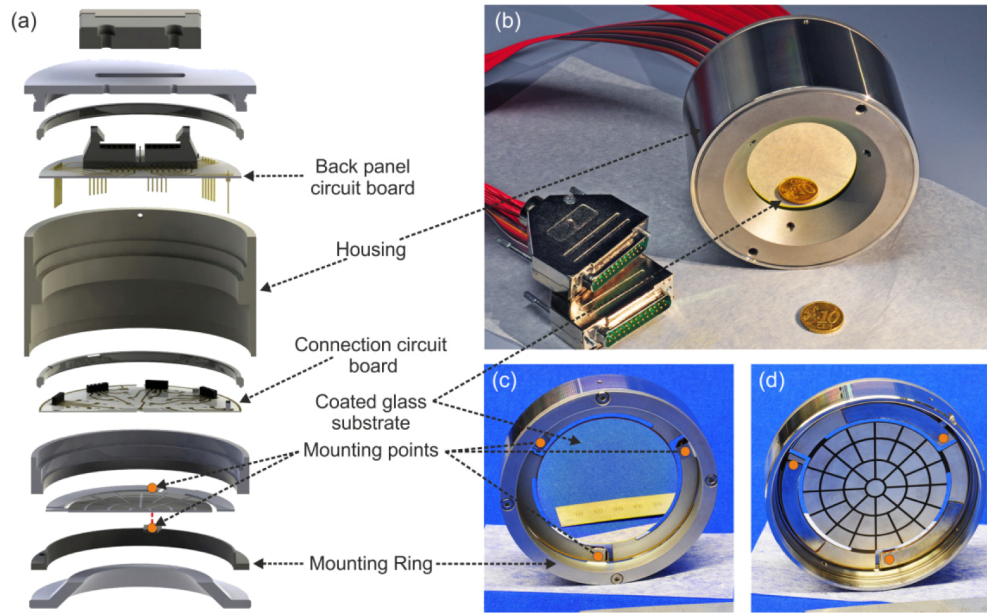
Deformable mirror assembly. (a) Exploded view. (b) Fully assembled mirror. (c) Front side and (d) back side of the mounted three arm structure.
